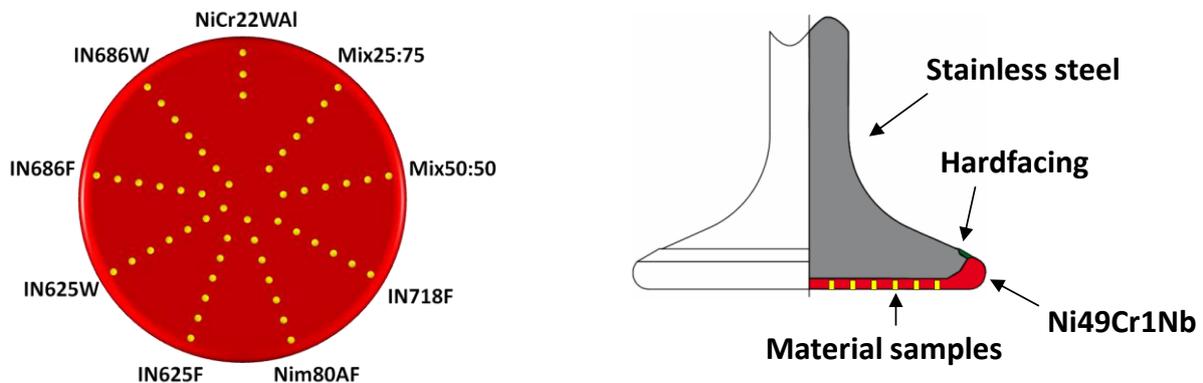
The design of the compound exhaust valve spindle with corrosion sample inserts.
